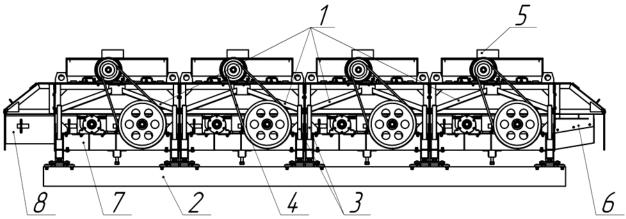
Four section rotary mixer: (1) mixer section; (2) support; (3) adjustable screws; (4) V-belt transmission; (5) electric motor;
